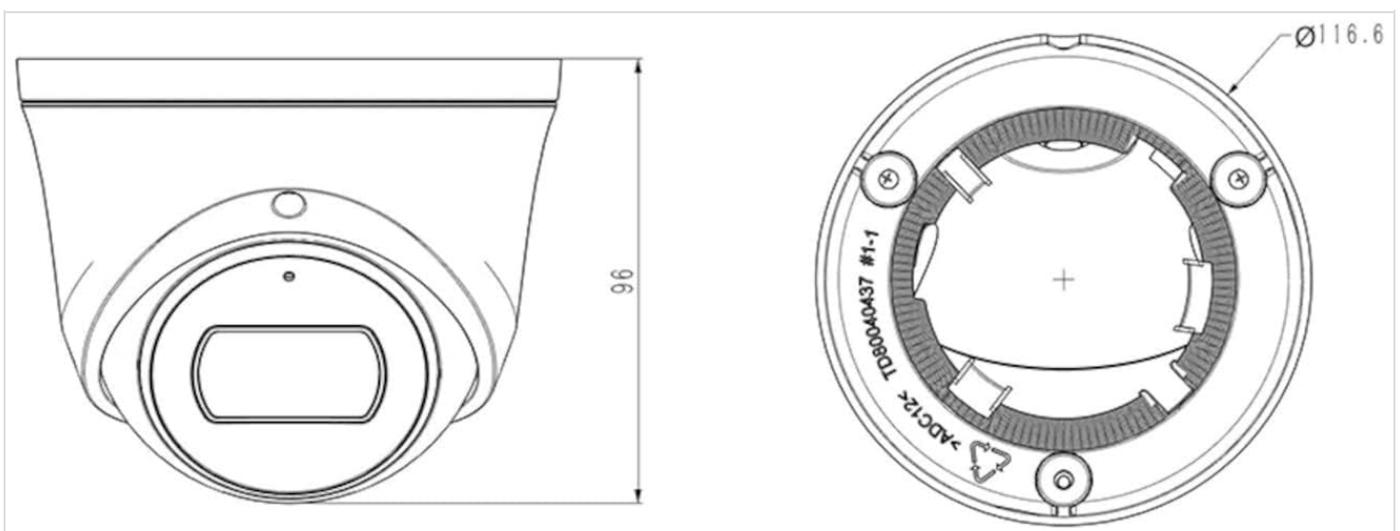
Technical drawing showing the dimensions of the Tiandy TC-C38XS IR Turret Camera (approx. 116.6mm diameter, 96mm height).
